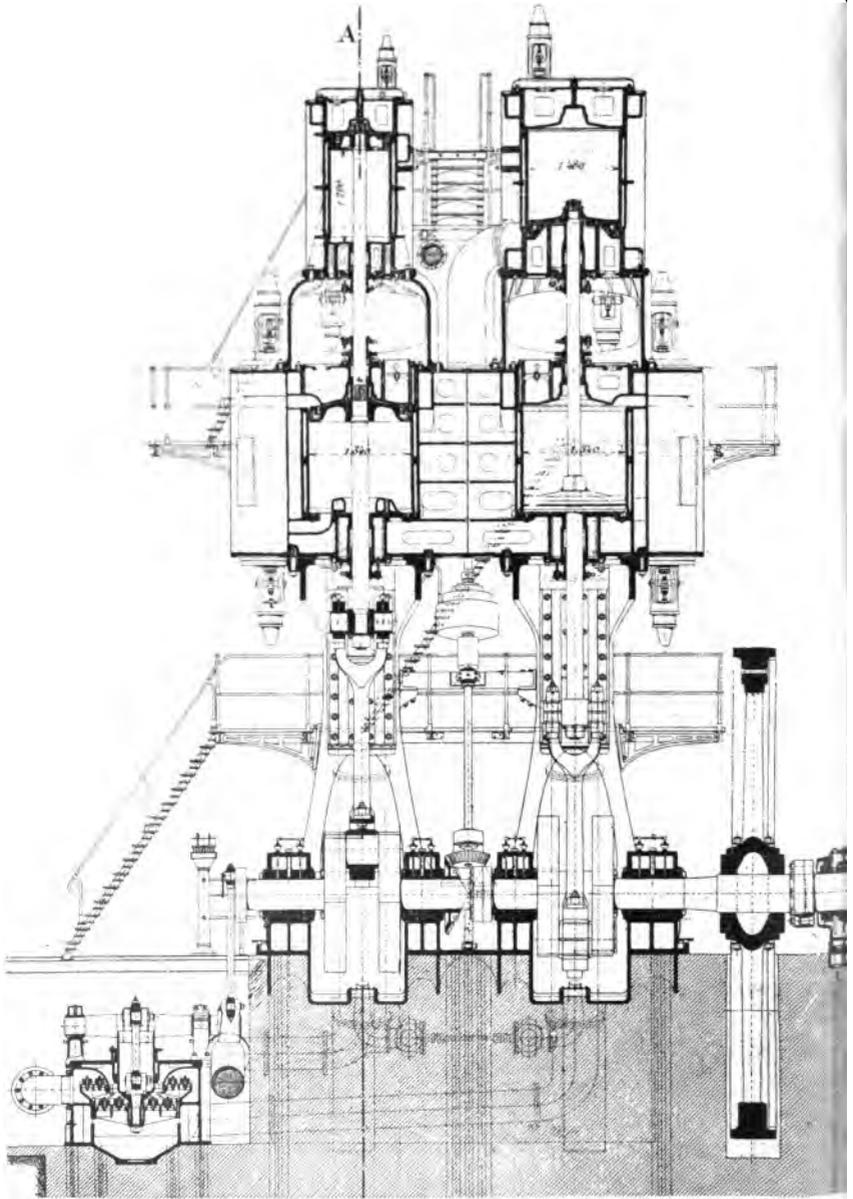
FRONT SECTIONAL VIEW OF 2,500 H.P. "BORSIG" ENGINE.
